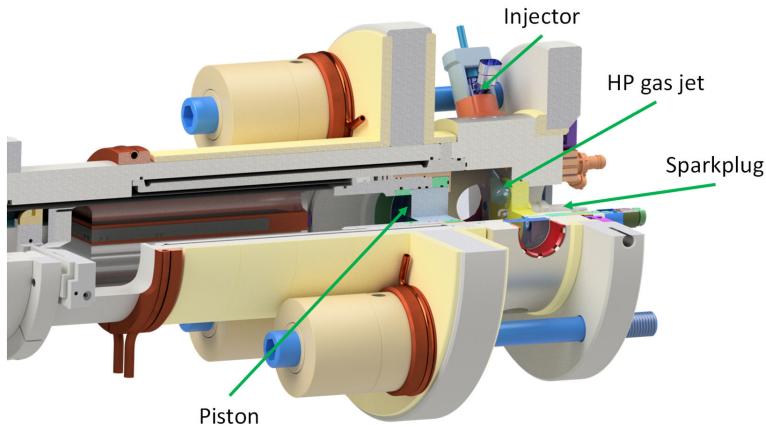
RCEM, combustion chamber rendering with HDEV1 injector and spark plug
